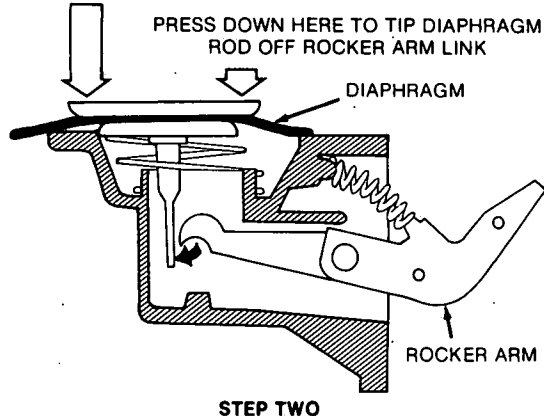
REMOVAL OF J-SERIES DIAPHRAGM ASSEMBLY
